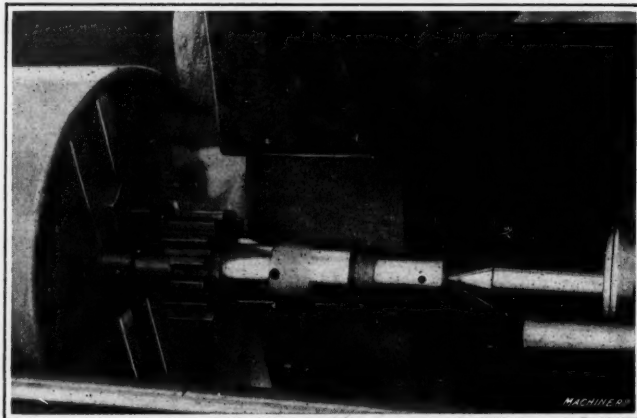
Set-up for grinding Main Drive Gear on Norton Plain Grinding Machine
